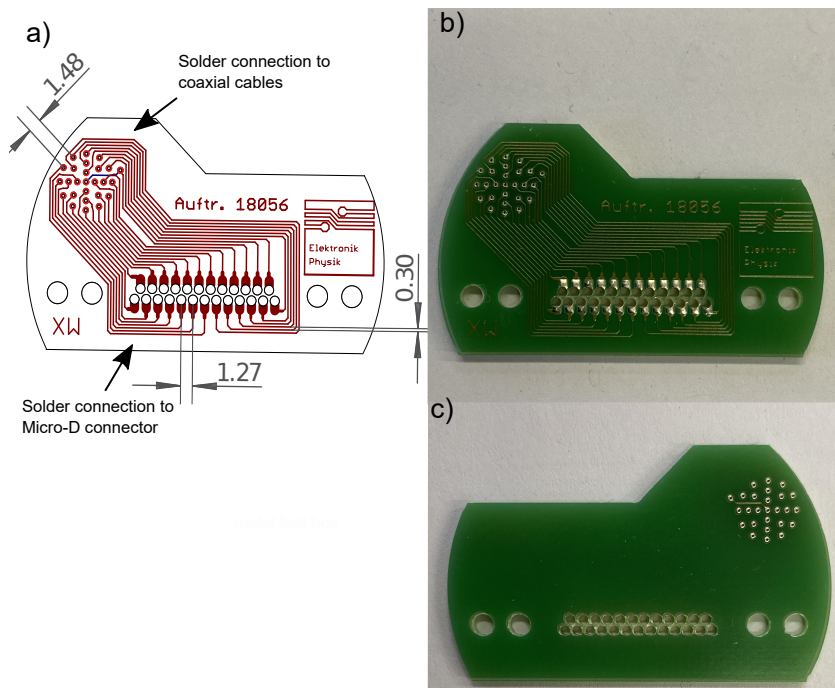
Coldfinger - printed circuit board: a) Design including scales in mm. b) Front side and c) back side. The walls of the holes for the soldering of the inner conductor of the coaxial cables are covered with metal. The inner conductors were fed through from the top to the back. Soldering happened on the backside.
